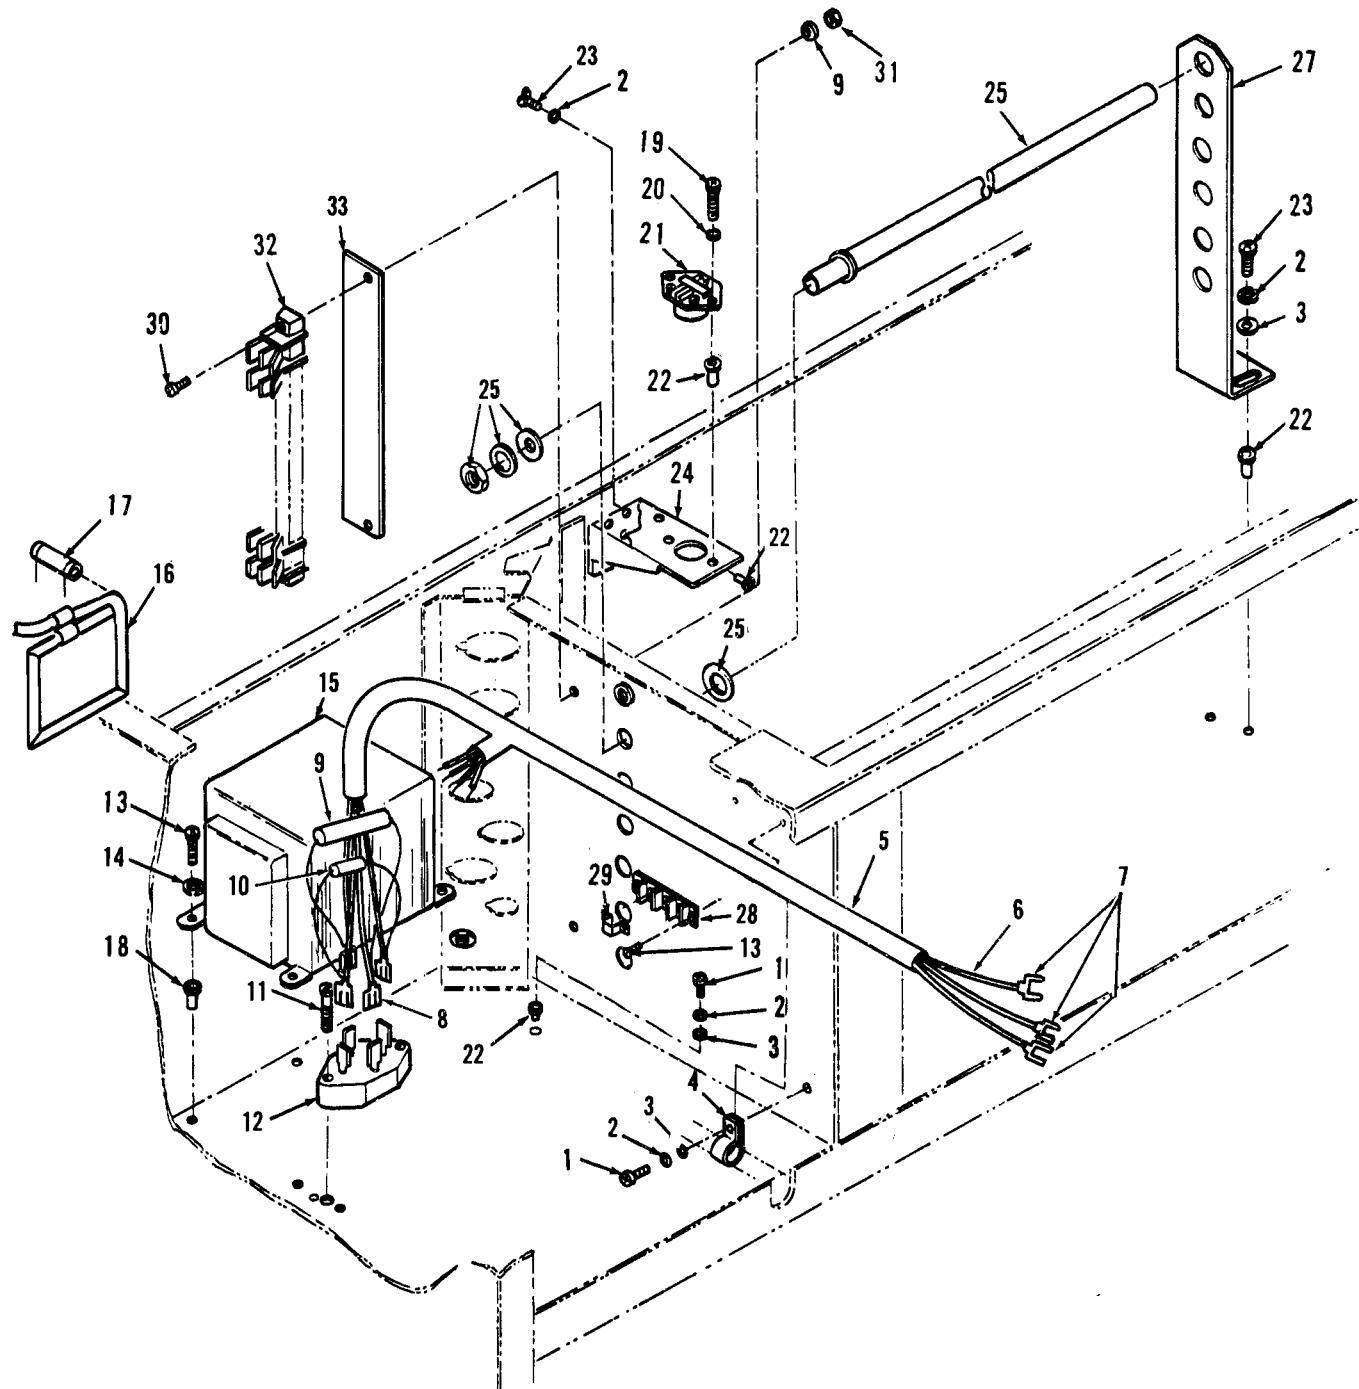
Heaters, Transformer, Rectifier and Related Parts
